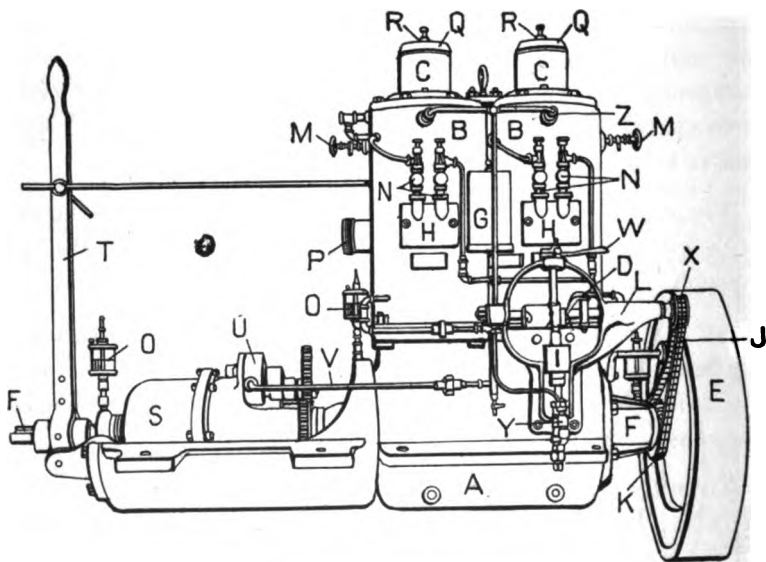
MEITZ AND WEISS ENGINE; Starboard Side.
